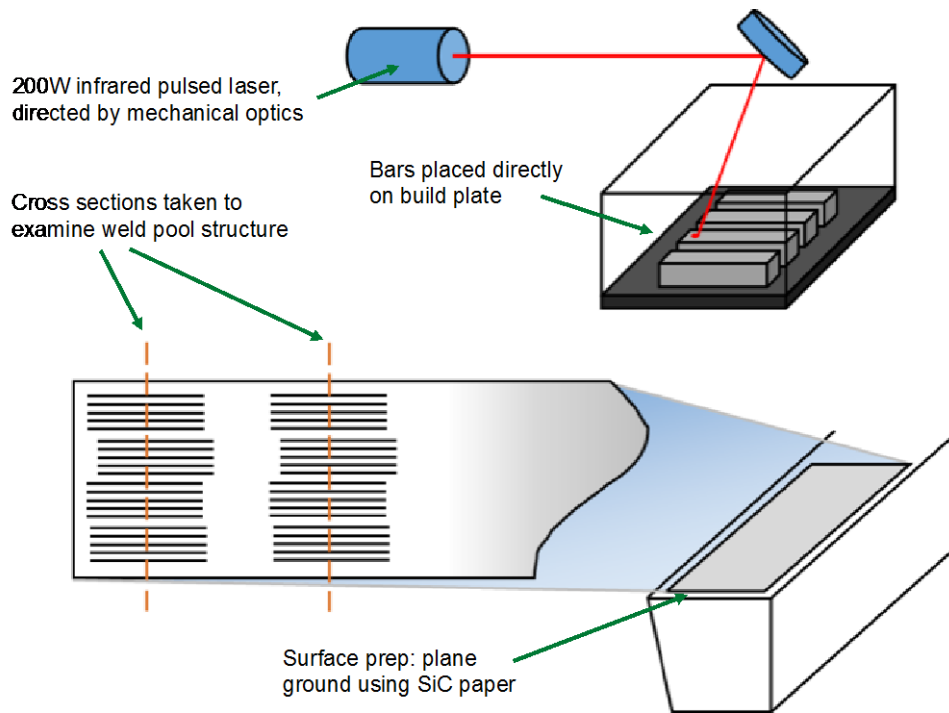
C.1.2. Experimental setup for pulsed-laser welding study. Source: ORNL.
